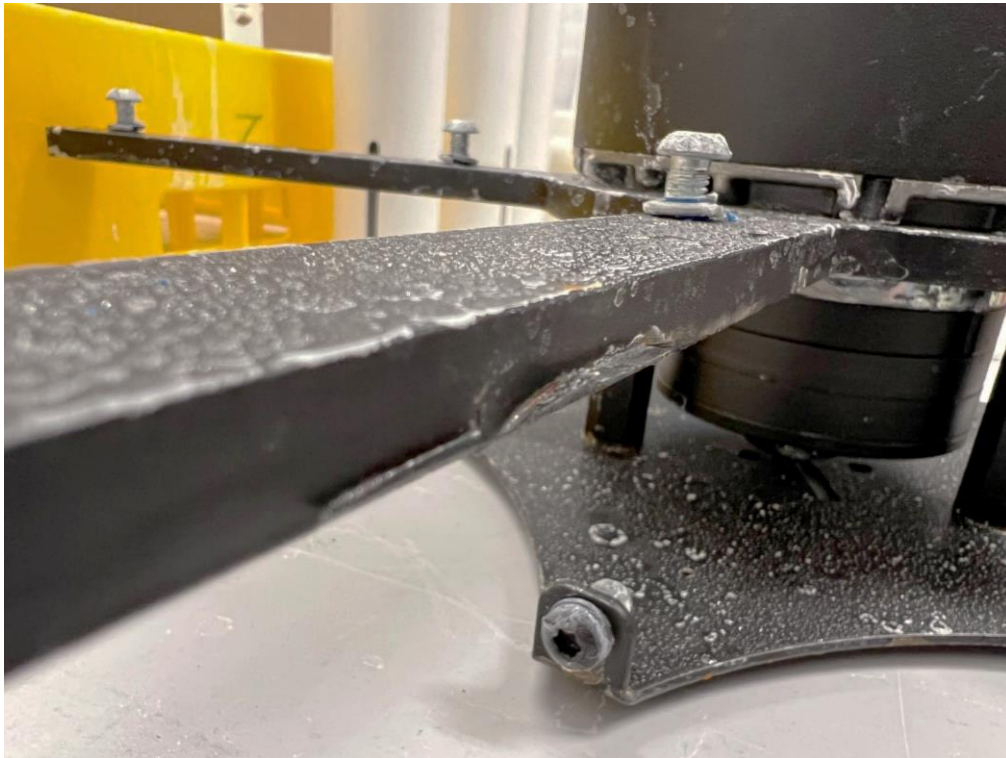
Visual inspection (fan). Corrosion and peeling of coating.
